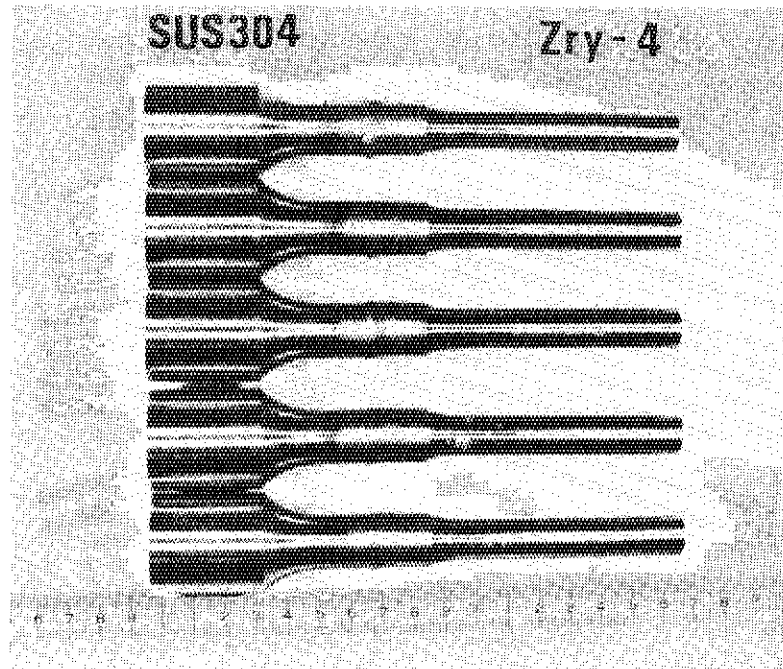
Specimen of the 10°-tapered eutectic joint for burst test (H1-H5)
